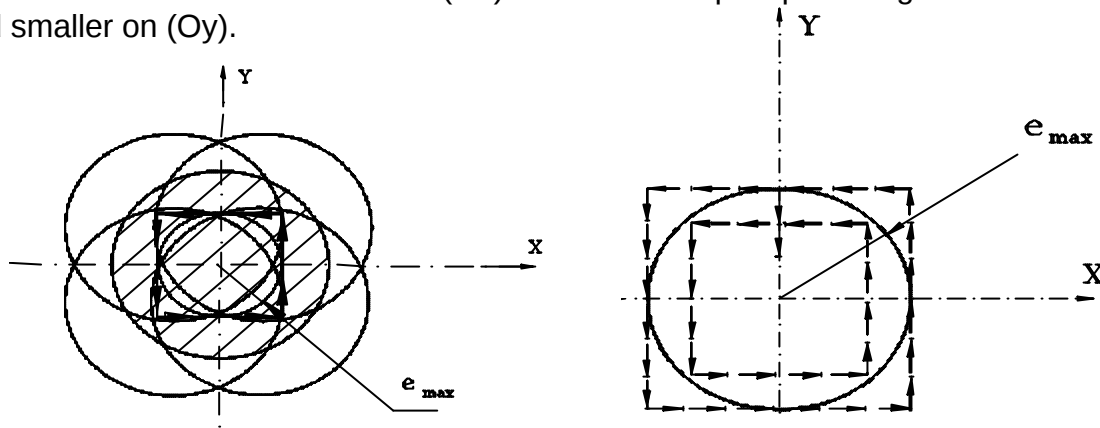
a) Positioning error. b) Bolt displacement on the holed surface
